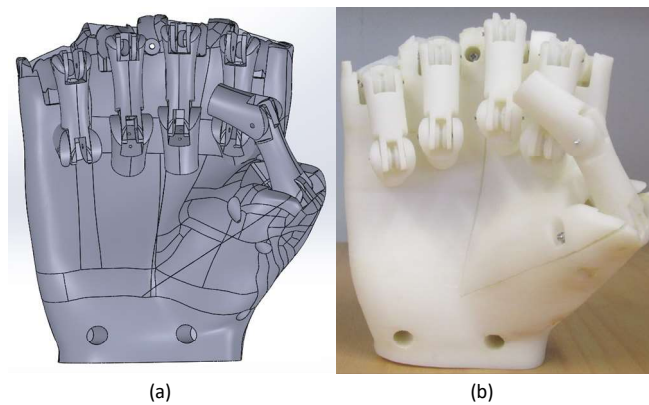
The proposed robotic hand (a) the 3D assembly model; (b) the printed and fabricated robotic hand.
